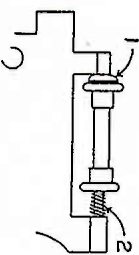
This guide roller is not adjustable. Spring 2 is supposed to hold it snugly against the washer 1. If it is not properly aligned, return the head to the manufacturer.
